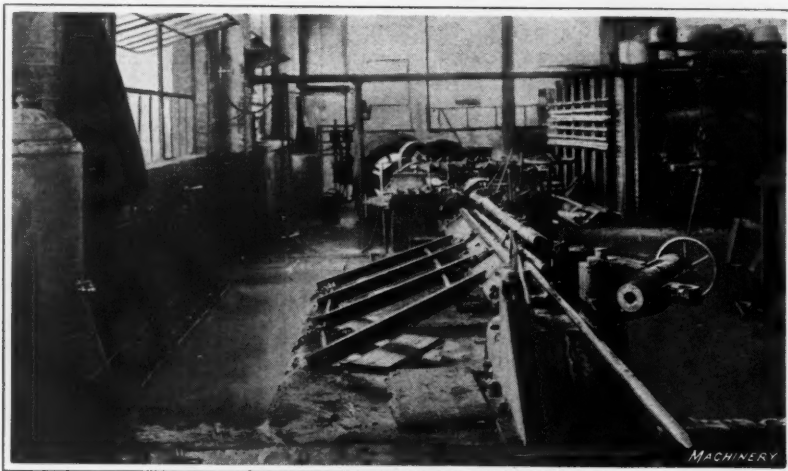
Special Rotary Piercing Machine on which the Billets are pierced preparatory to the Tube Drawing Operations
